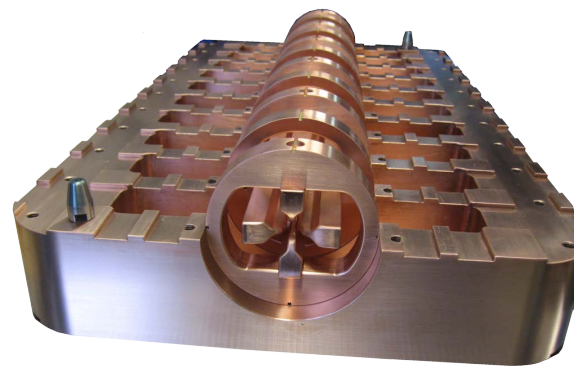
Front view of the ring-electrode-system of the unmodulated prototype. The steel-tank and the upper half-shell are removed. Ladder dimensions: LxHxB: 650x150x365 mm.
